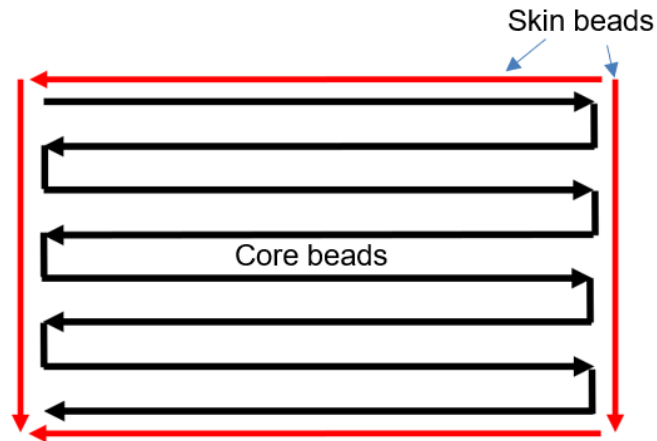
Deposition tool path strategy, showing combination of Parallel beads and wide oscillation beads, for depositing the skin and core sections respectively
